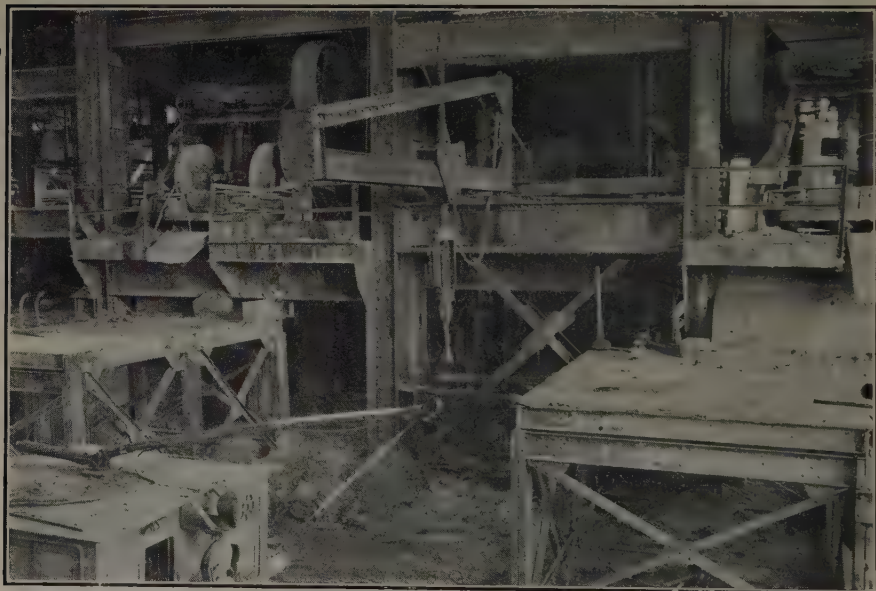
MACHINERY USED BY UNITED VERDE COPPER CO. FOR MIXING AND TAMPING PERICLASE CONVERTER LININGS.
